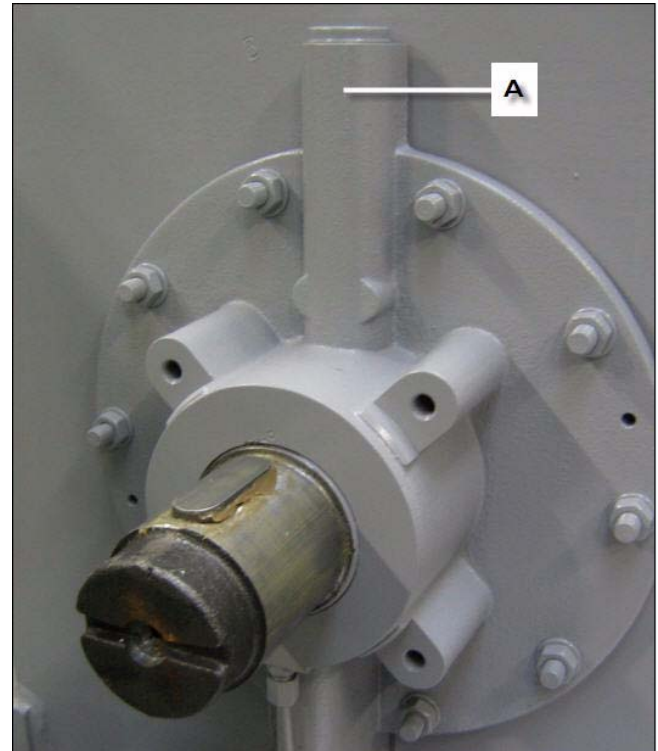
Oil lubrication pressure regulator (A)
